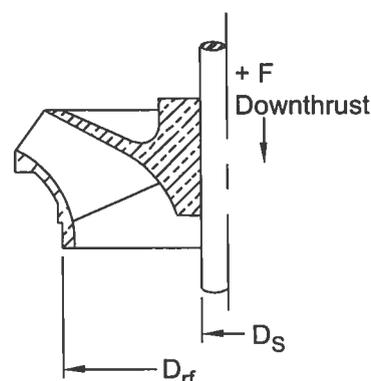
Enclosed impeller plain top shroud
